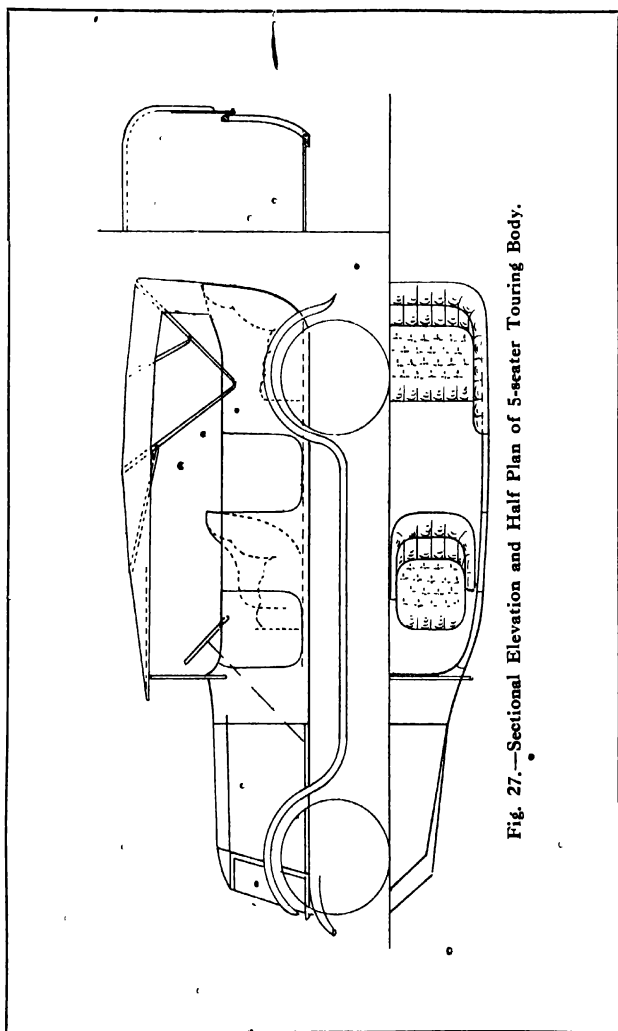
Sectional Elevation and Half Plan of 5-seater Touring Body.
